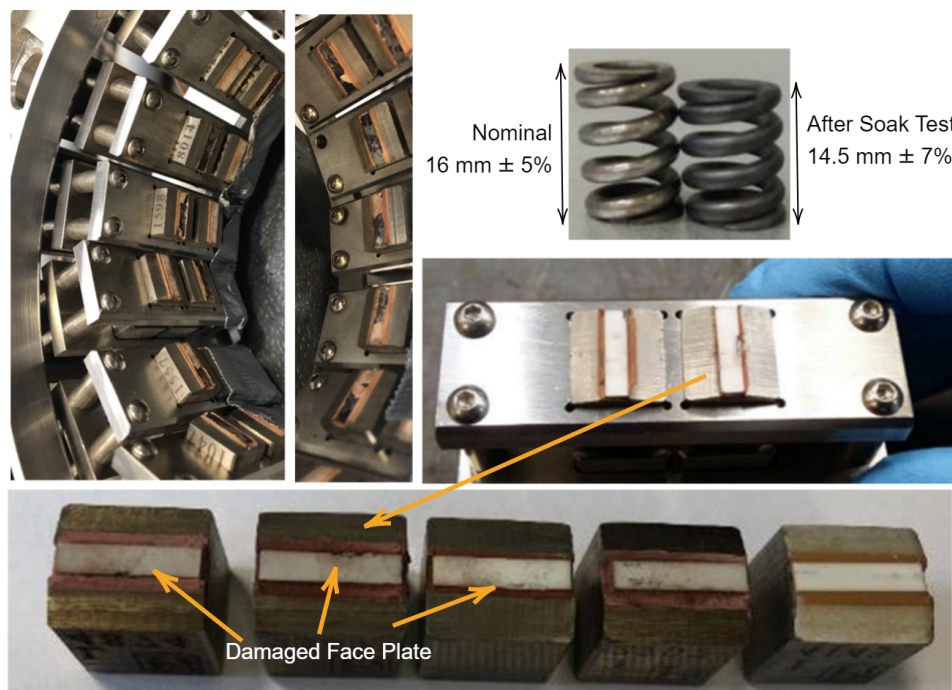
Transducer collar array after the monitoring trial showing damaged transducers with cracked face plate and transducer holder springs showing loss in compression force.
